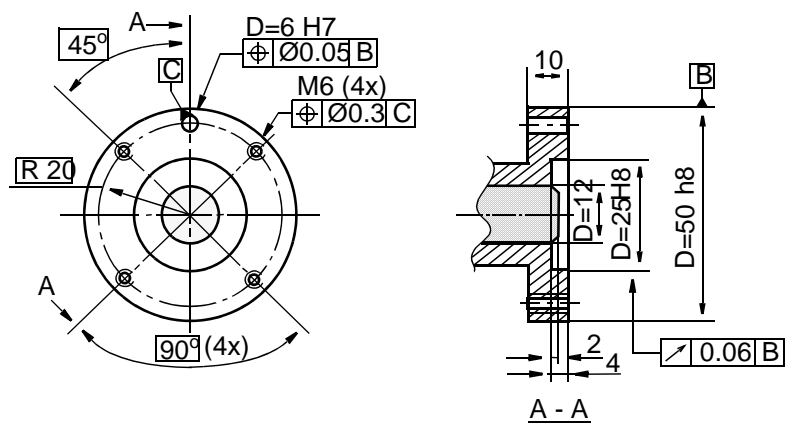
The mechanical interface, mounting flange (dimensions in mm).
